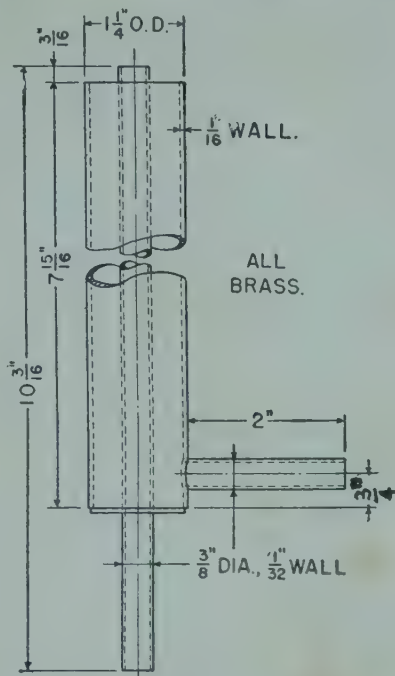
Annealing burner which furnishes large bushy flame for uniform heating.
